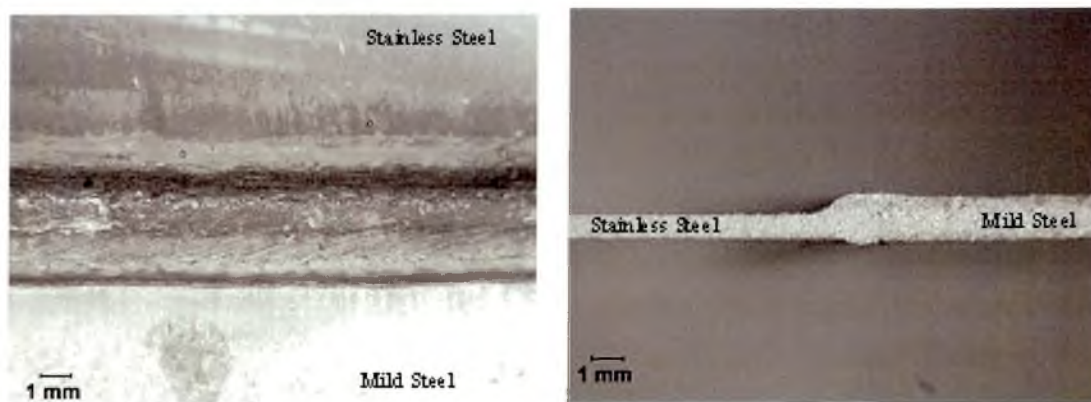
An example of a Laser Hybrid Welded Butt joints showing the weld bead and the joint fit up 1.5mm welded to 0.75mm plates
